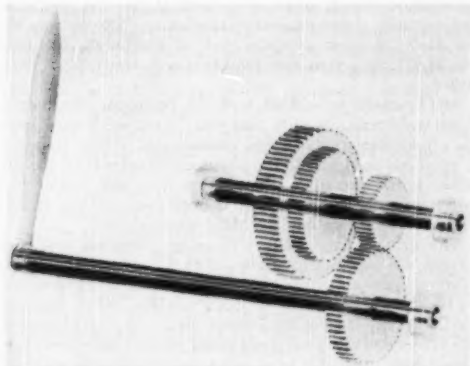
ROLLPINS ARE SHOWN HERE USED AS SHAFTS FOR ASSEMBLY OF GEAR TRAINS ON A METERING DEVICE
